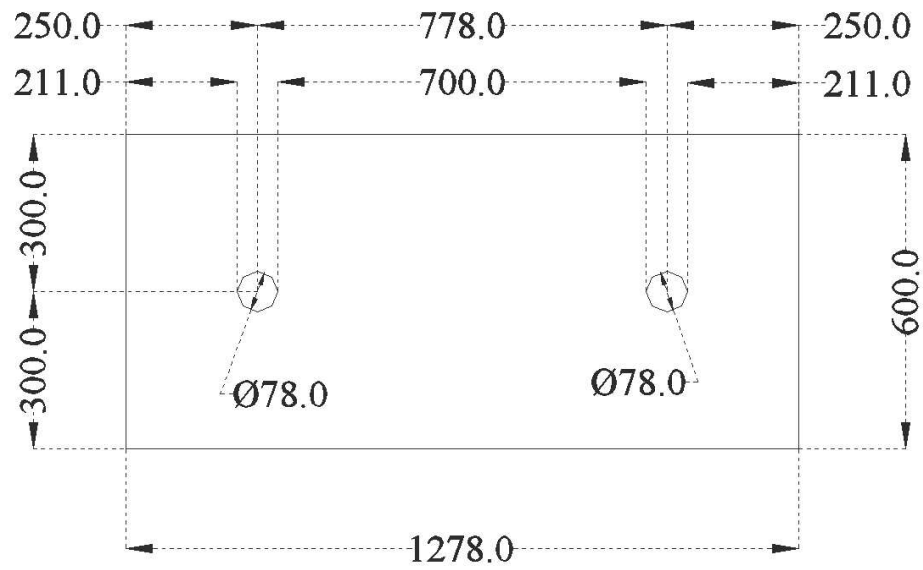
1. Plane view of loading plate, all dimensions are in mm
